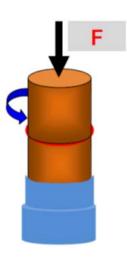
Schematic Representation of Rotary Friction Welding Process
